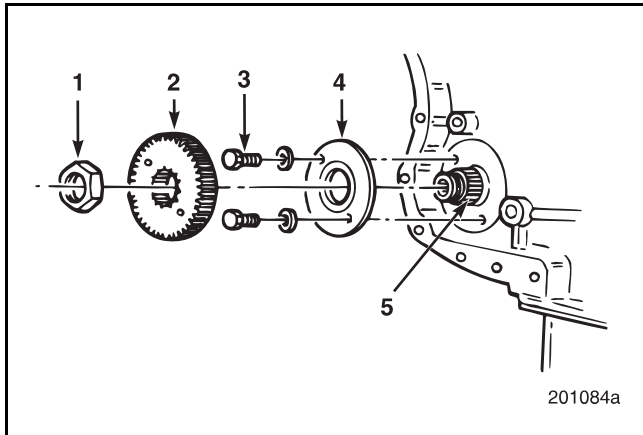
Auxiliary Driveshaft Gear Installation
